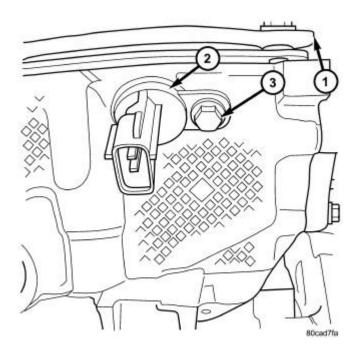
CAMSHAFT POSITION SENSOR Courtesy of CHRYSLER LLC
